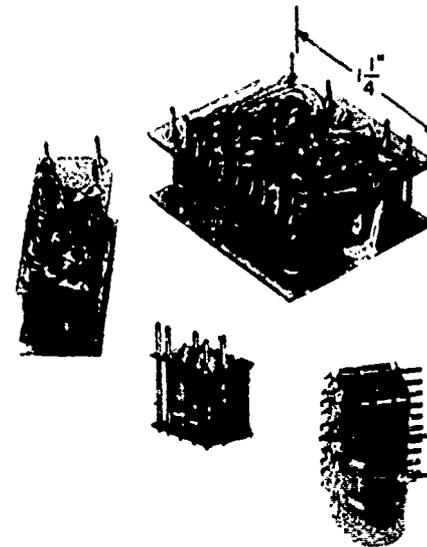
Microminiature Construction Using Printed Wiring Boards
